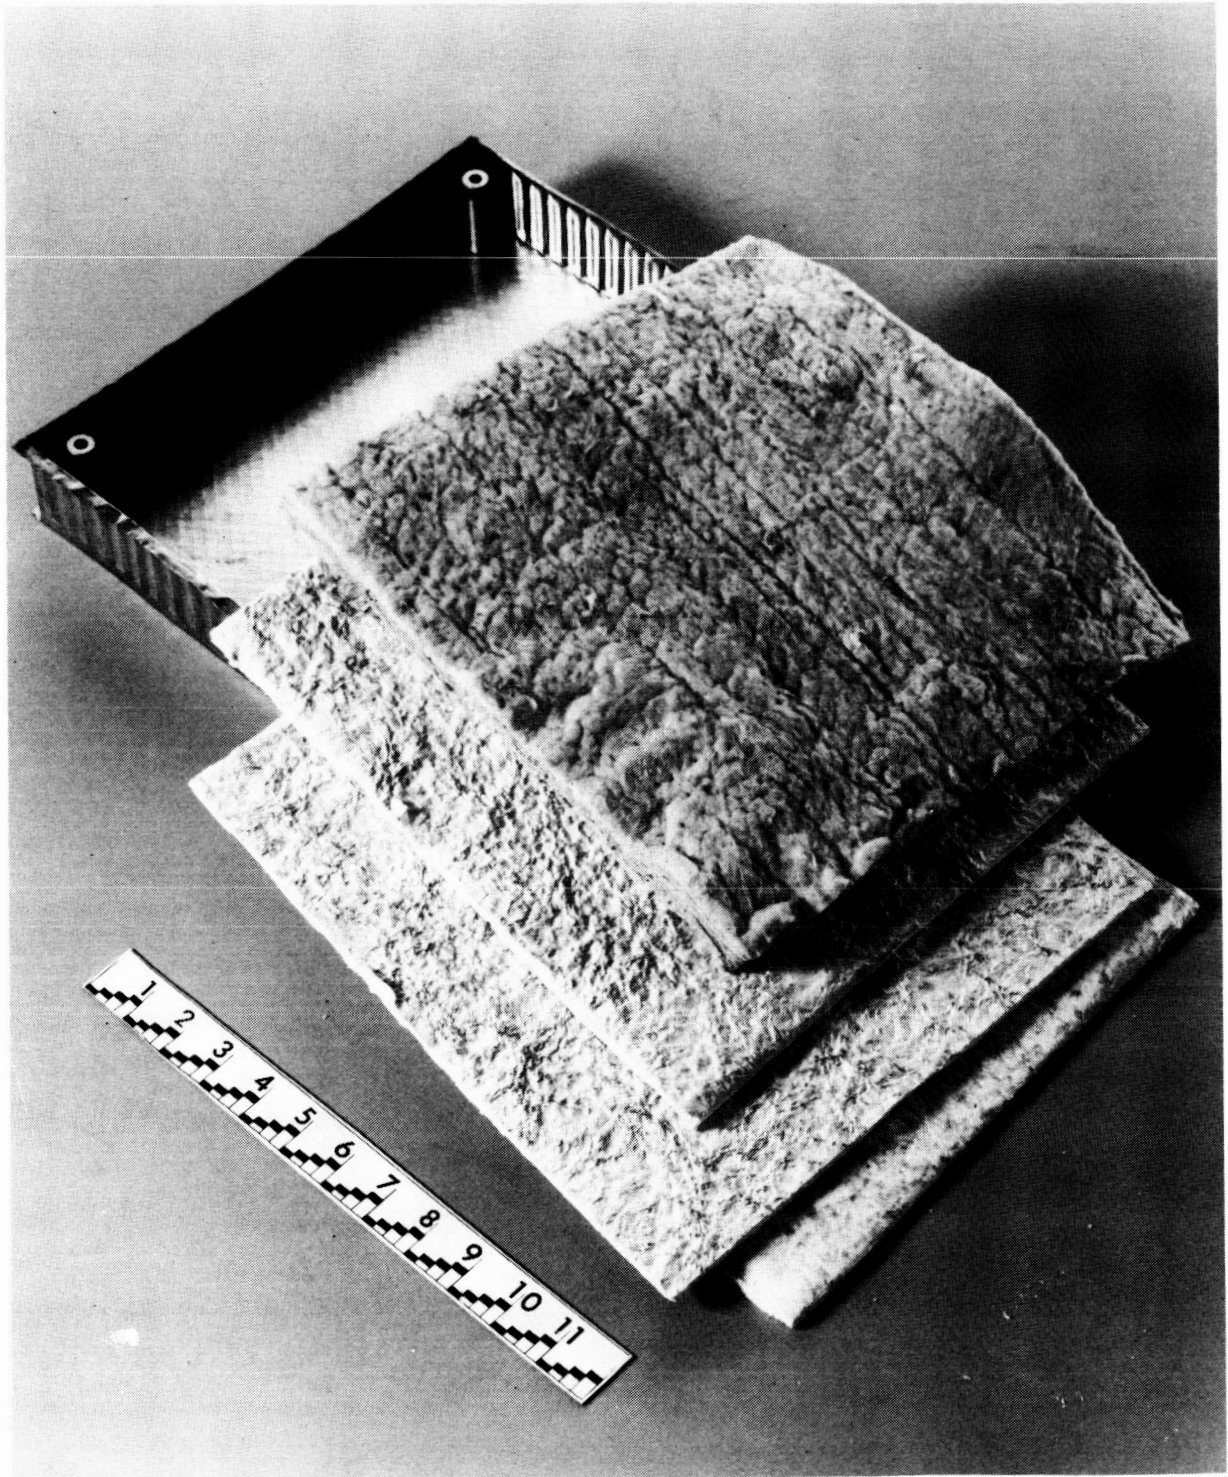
Pre-cut Q-Fiber Felt and DYNAFLEX Ready to be Installed into the INCONEL 617 Subassembly
